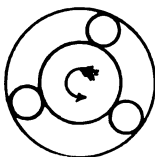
SHOWING THAT BALL BEARING IS SIMILAR TO EPICYCLIC GEAR.
